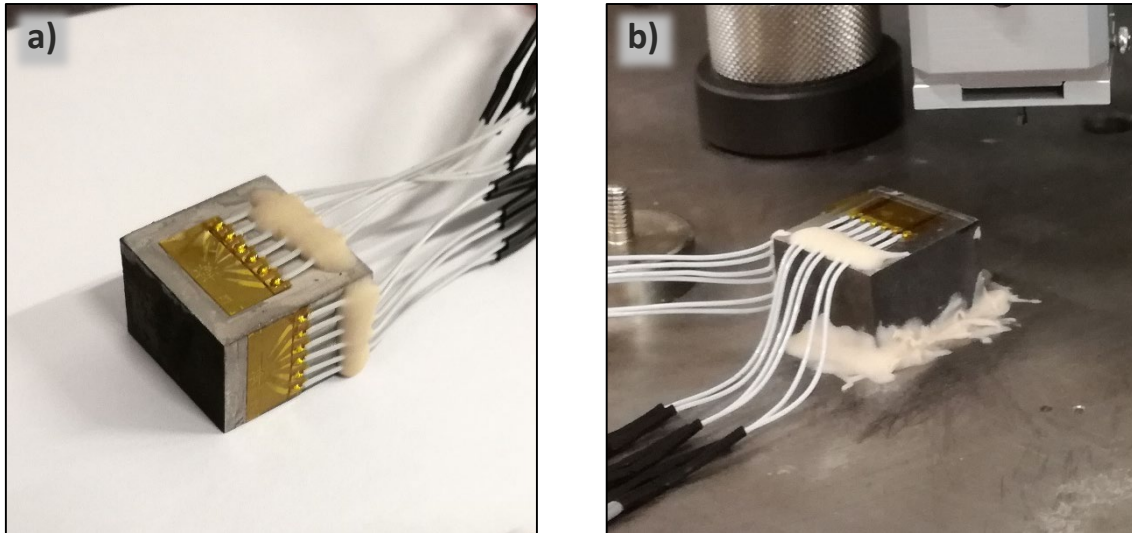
Hole-drilling strain-gage method: a) specimen after application of the rosettes; and b) specimen mounted on the positioning base
